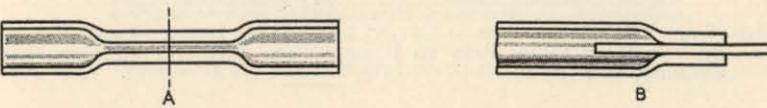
THE SHRINKING-DOWN METHOD OF MAKING A PLATINUM-GLASS SEAL
